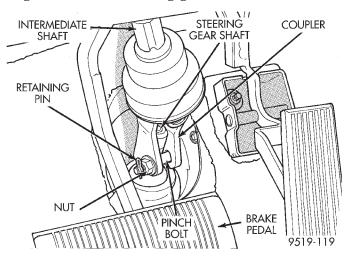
Intermediate Shaft Coupler Attachment To Steering Gear
